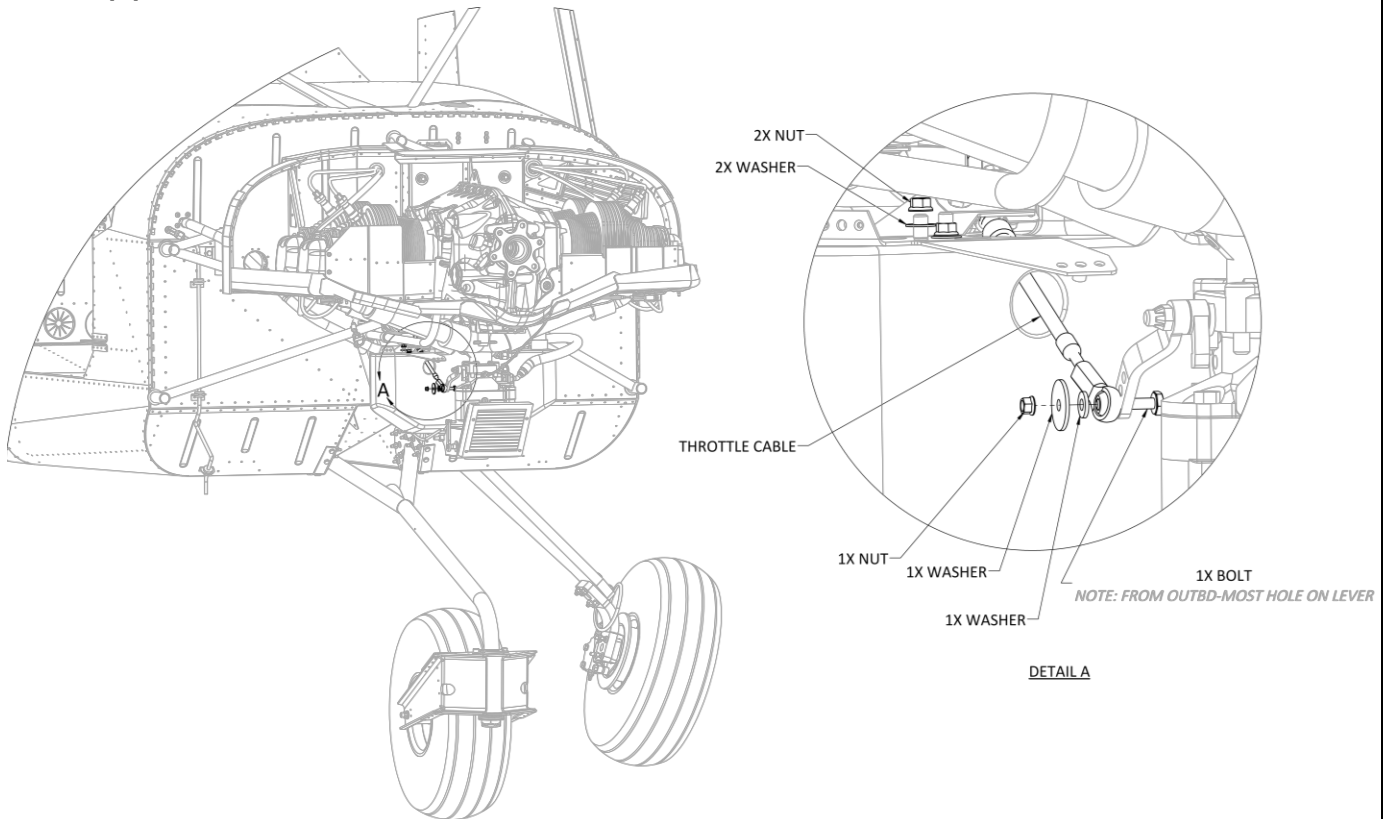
Throttle cable attachment to carburetor.
